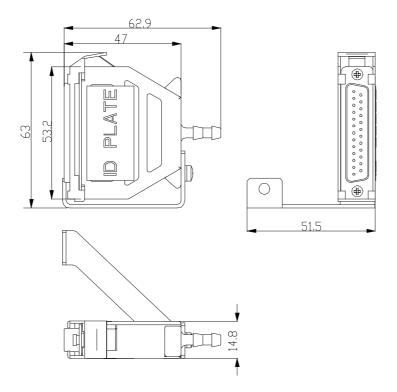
Outline dimensions BE6400-01-(XX), measures in mm
